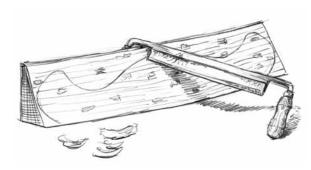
Many shaping operations can be handled by the drawknife.
